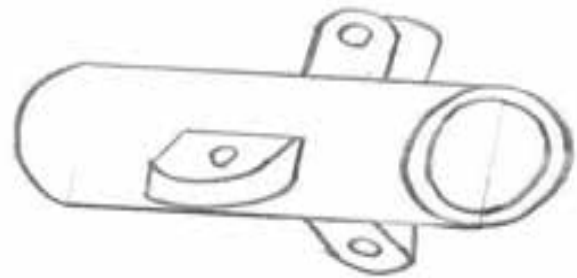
Sleeve of Six-Leg Pipe Inspection Robot
